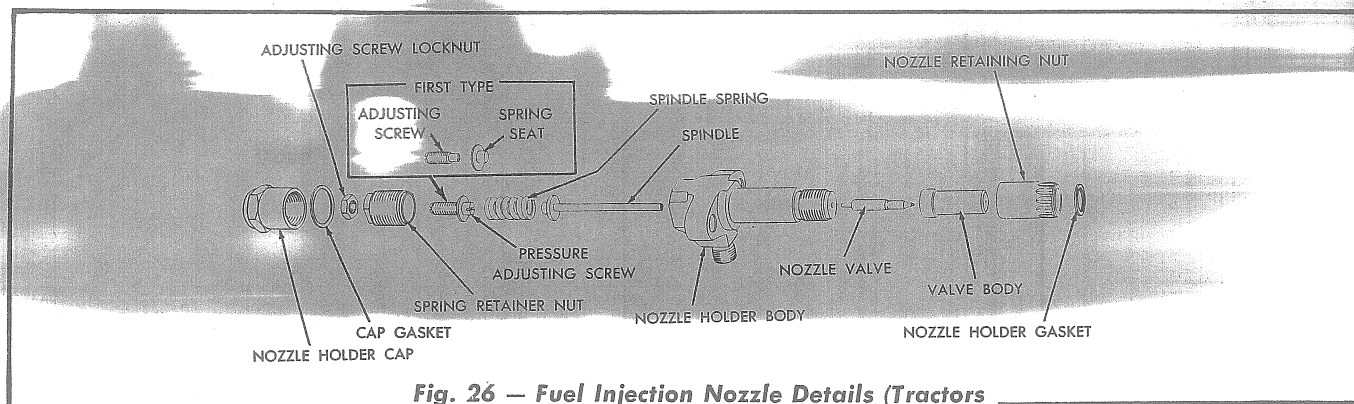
Fuel Injection Nozzle Details (Tractors Prior to Serial No. 4001)
